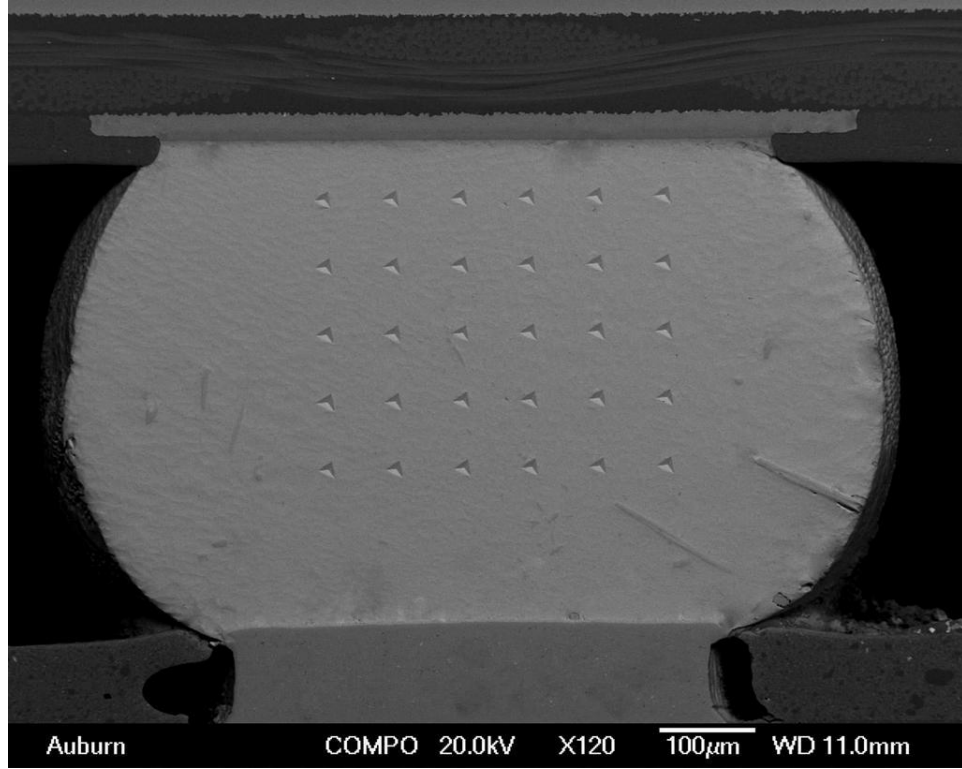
SAC305 Solder Joint after Nanoindentation Testing
